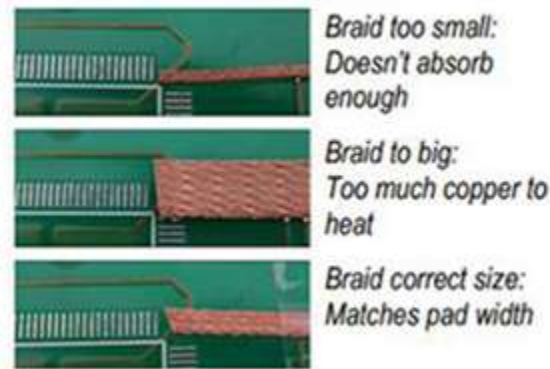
Match Solder Wick Width to Solder Joint or Contact Pad
